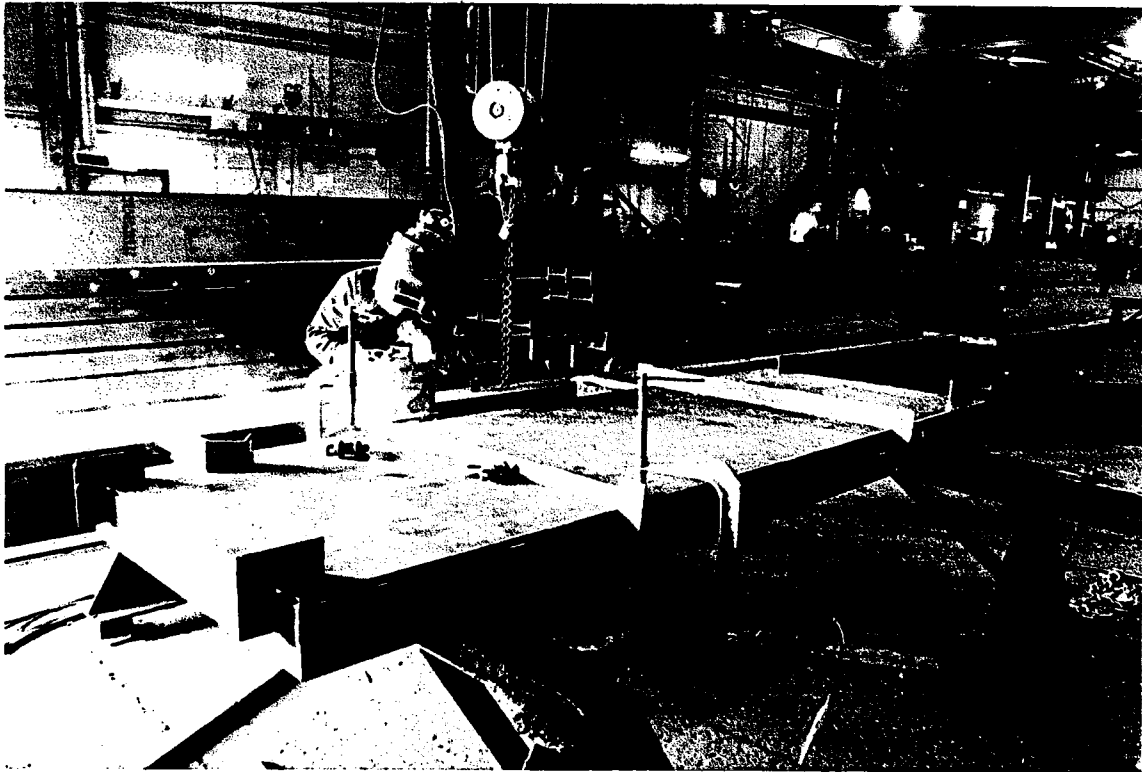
Clamping frames on specimen P6-1 and reaction plate assembly
